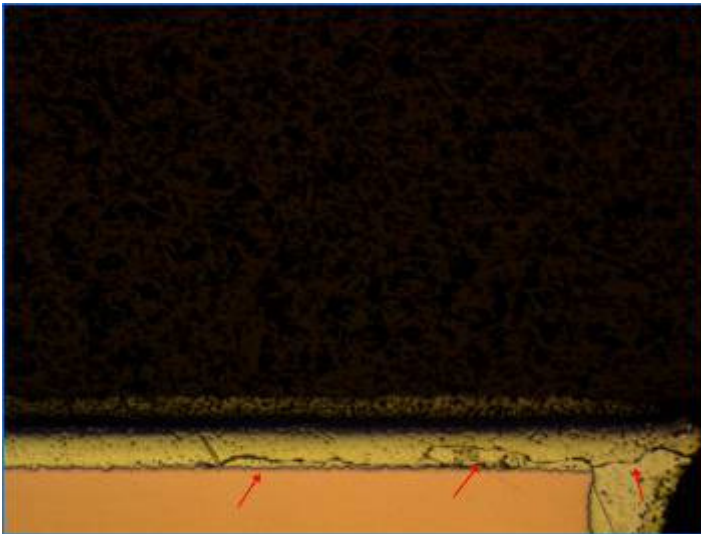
cross section, SN67, U52, left lead solder crack, 200xc partial
